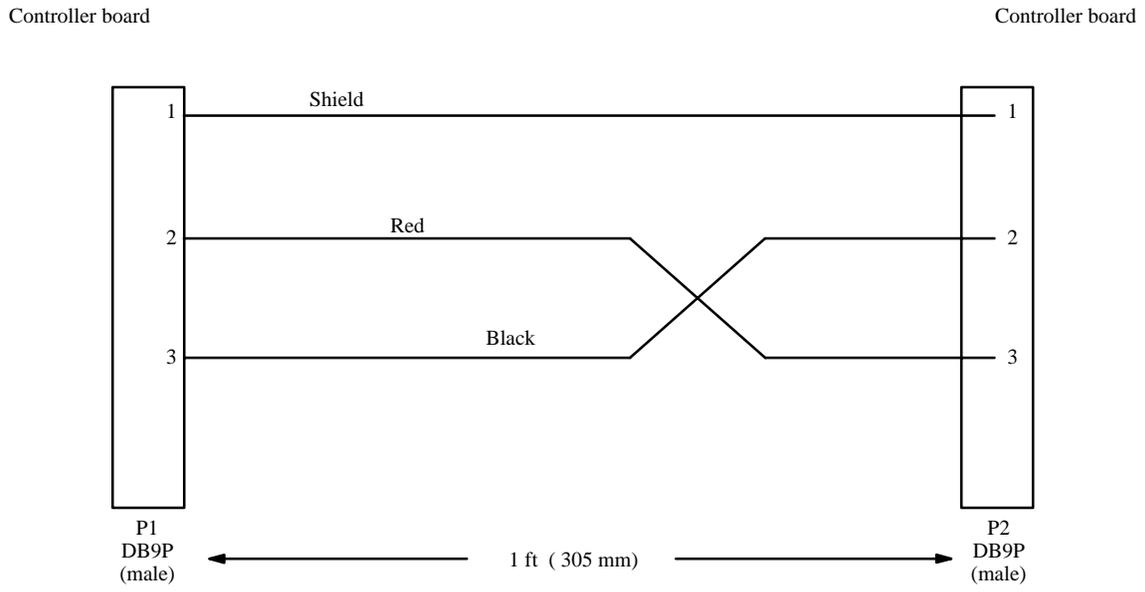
Assembly, BCS-3000 Redundancy Cable. Ref: Thomson drawing no. 01-041340-001.
